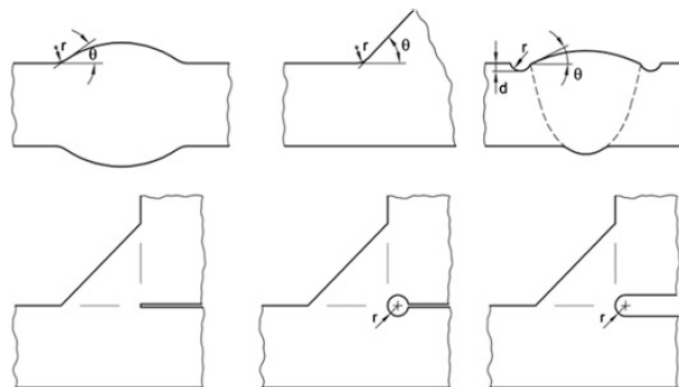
Recommended weld shape for ENSC.[21]
